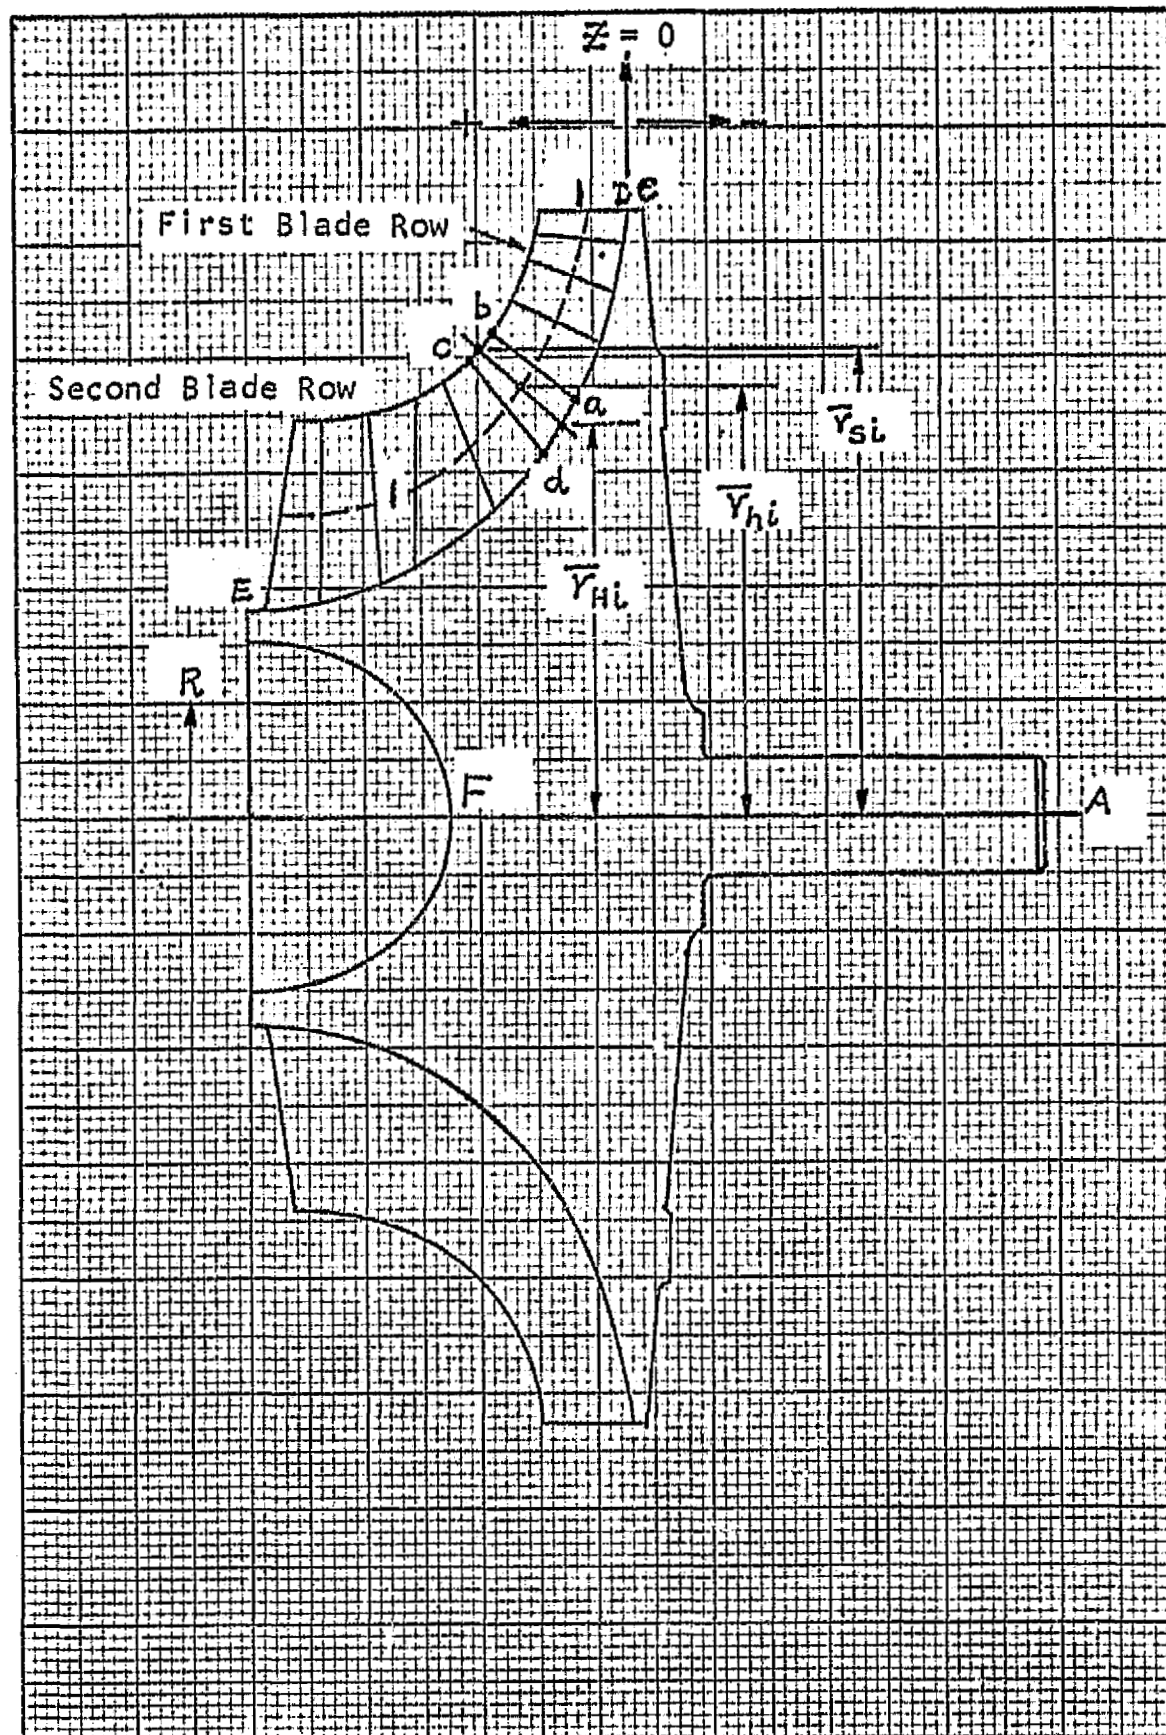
MERIDIONAL VIEW OF ROTOR SHOWING HEAT TRANSFER AREAS,
